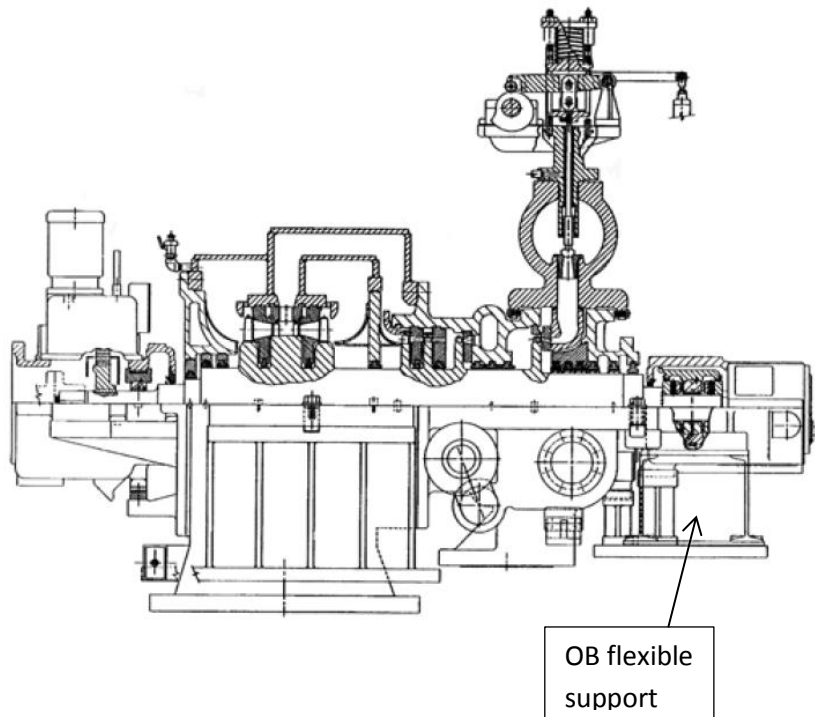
Typical mechanical drive steam turbine cross-section (TPS)
